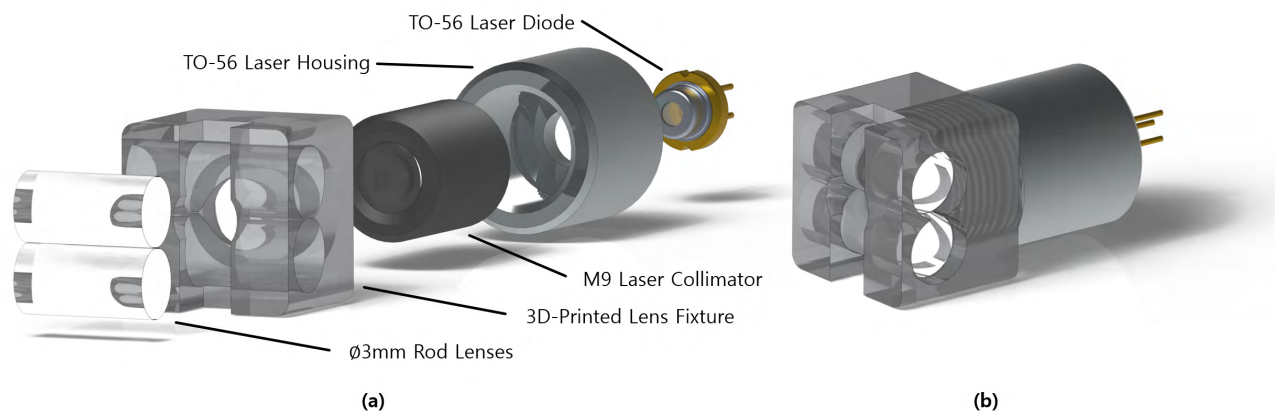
An exploded view (a) and an assembled view (b) of the proposed line laser projector assembly.
